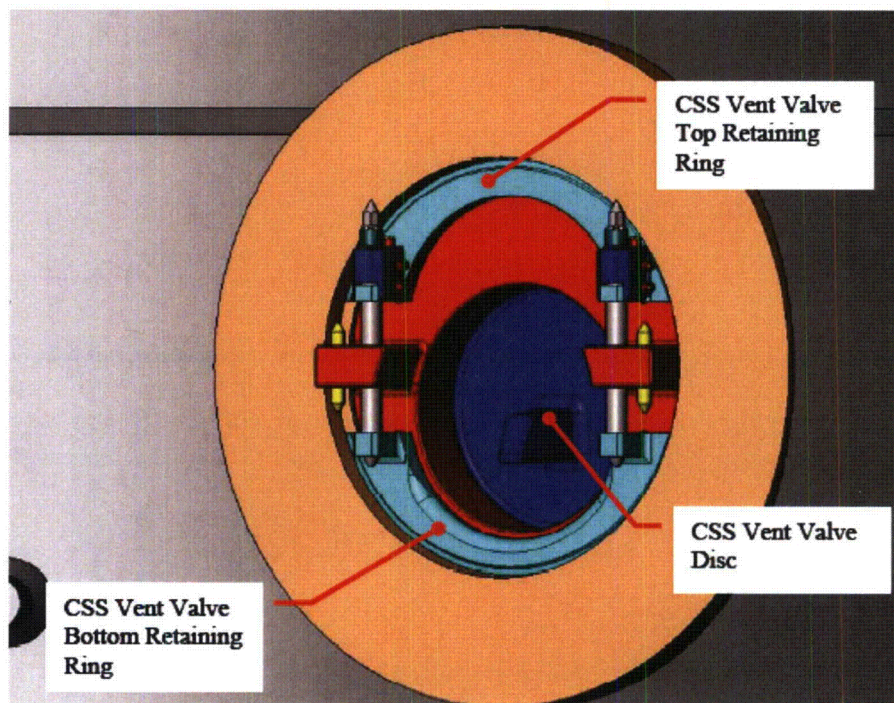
Typical Vent Valve (Inside Core Support Shield View)
